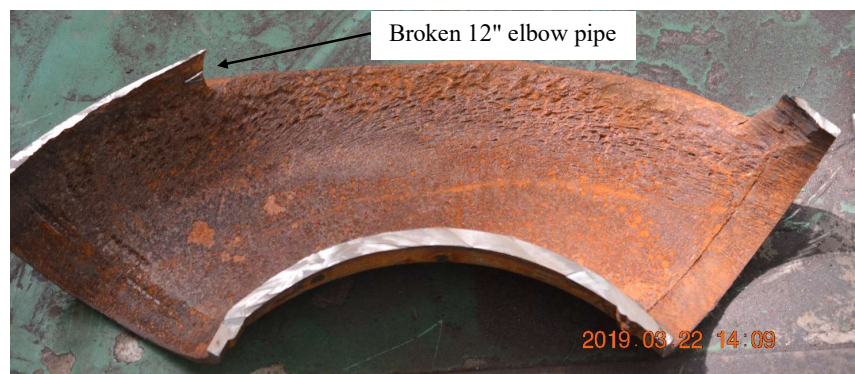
Broken 12" elbow pipe with ASTM A234 low carbon steel specification and inspection location
